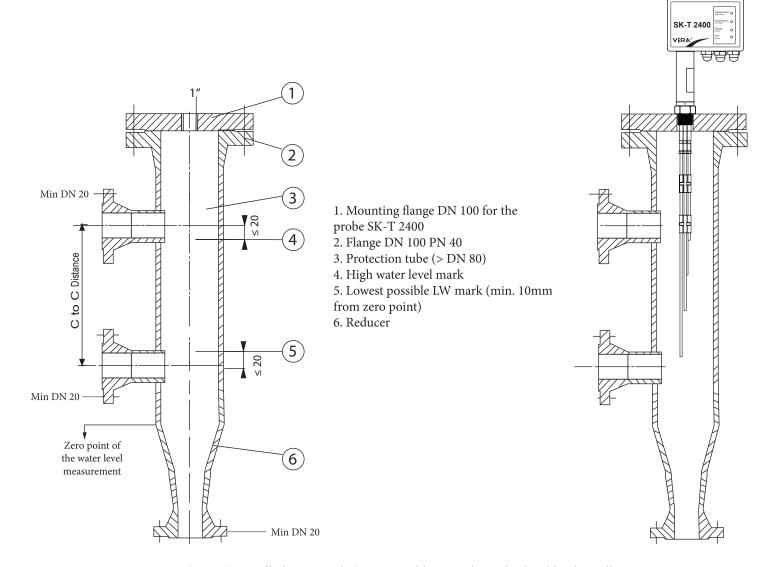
Installation Example 2, Usage With Protection Tube Outside The Boiler.
